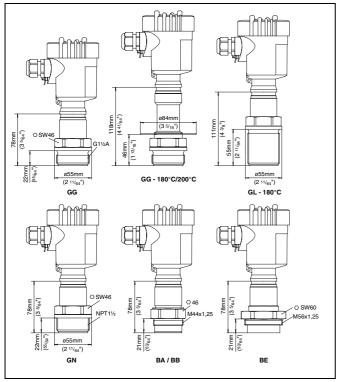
VEGABAR 65, threaded fitting: GG = G1½ A, GL = G1½ A thread length 55 mm, GN = 1½ NPT, BA/BB = M44X1.25; BE = M56X1.25
